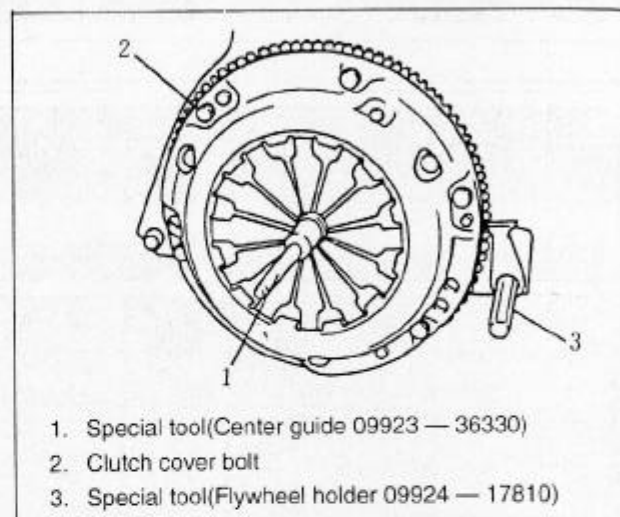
B — 16 ASSEMBLING CLUTCH DISC
